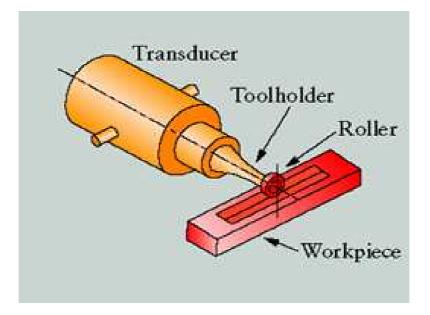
Ultrasonic seam welding process [65].
